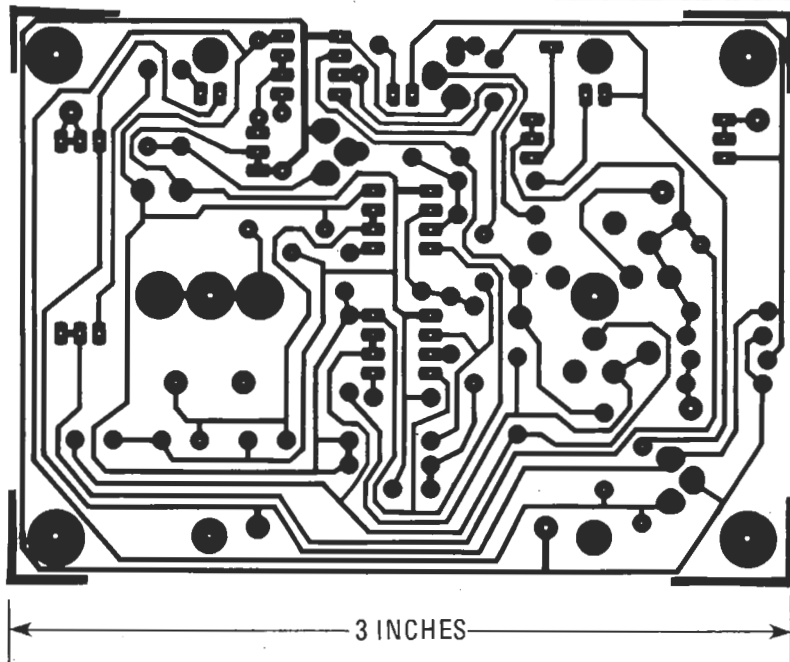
FOIL PATTERN for a single-sided board is shown full size.
